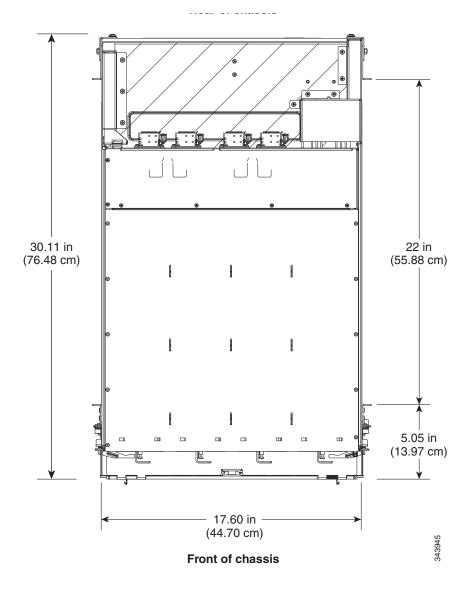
Cisco ASR 9922 Router Chassis Footprint and Dimensions—Top-Down View
